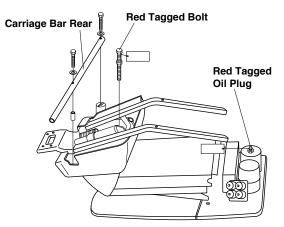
Removing Carriage Bar Rear, Red Tagged Bolt and Oil Plug
